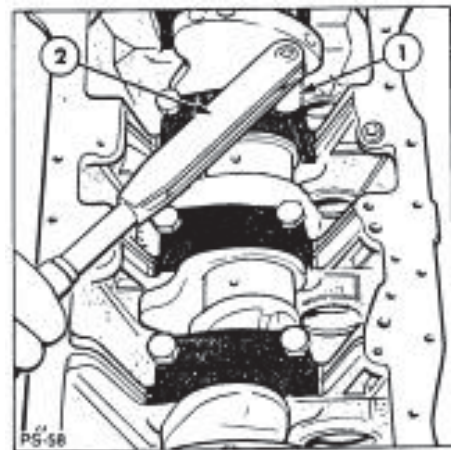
Torqueing Main Bearing Cap Bolts
